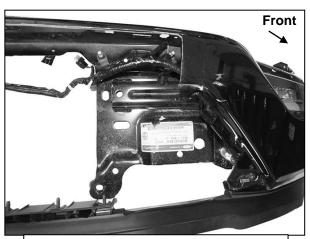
Place bumper Cut Templates onto front bumper. Trace outline of cut templates onto bumper cover. Cut along traced line
